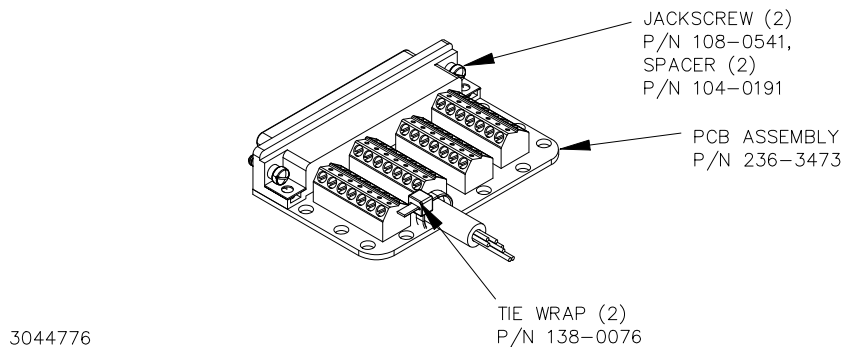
KIT 219-0646 ADAPTER ASSEMBLY COMPONENTS
